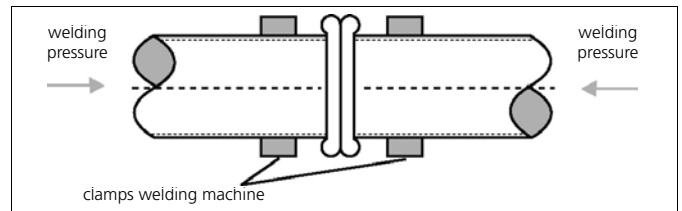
Welding / cooling a pipe or fitting
